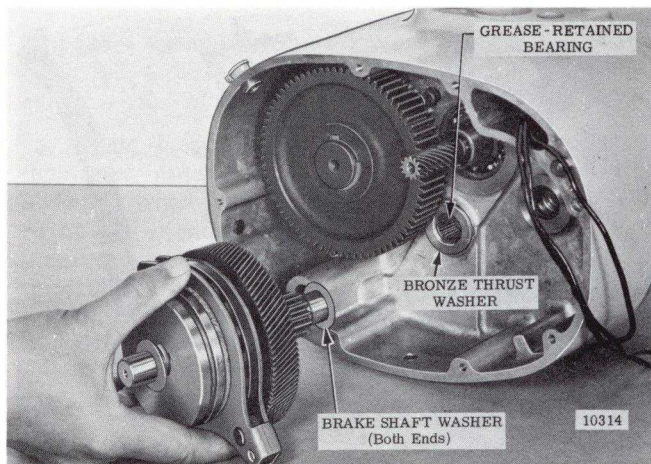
Removing Load Brake and Clutch Assembly (1/4 & 1/2 Ton Capacity Hoists)
